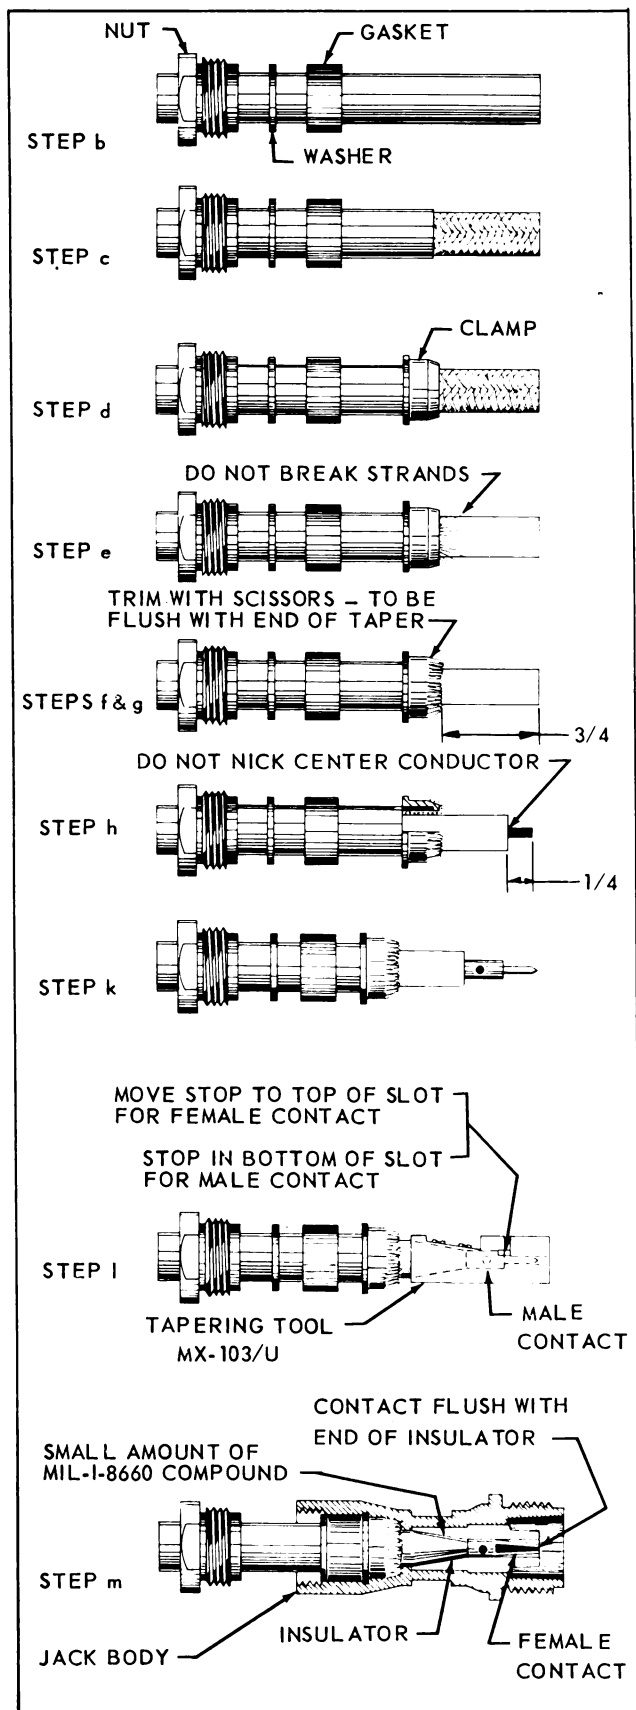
Attaching Standard HN Connectors to Coaxial Cable
